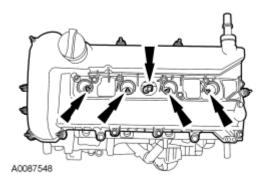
Identifying Cylinder Head Temperature Sensor And Spark Plugs Courtesy of FORD MOTOR CO.
